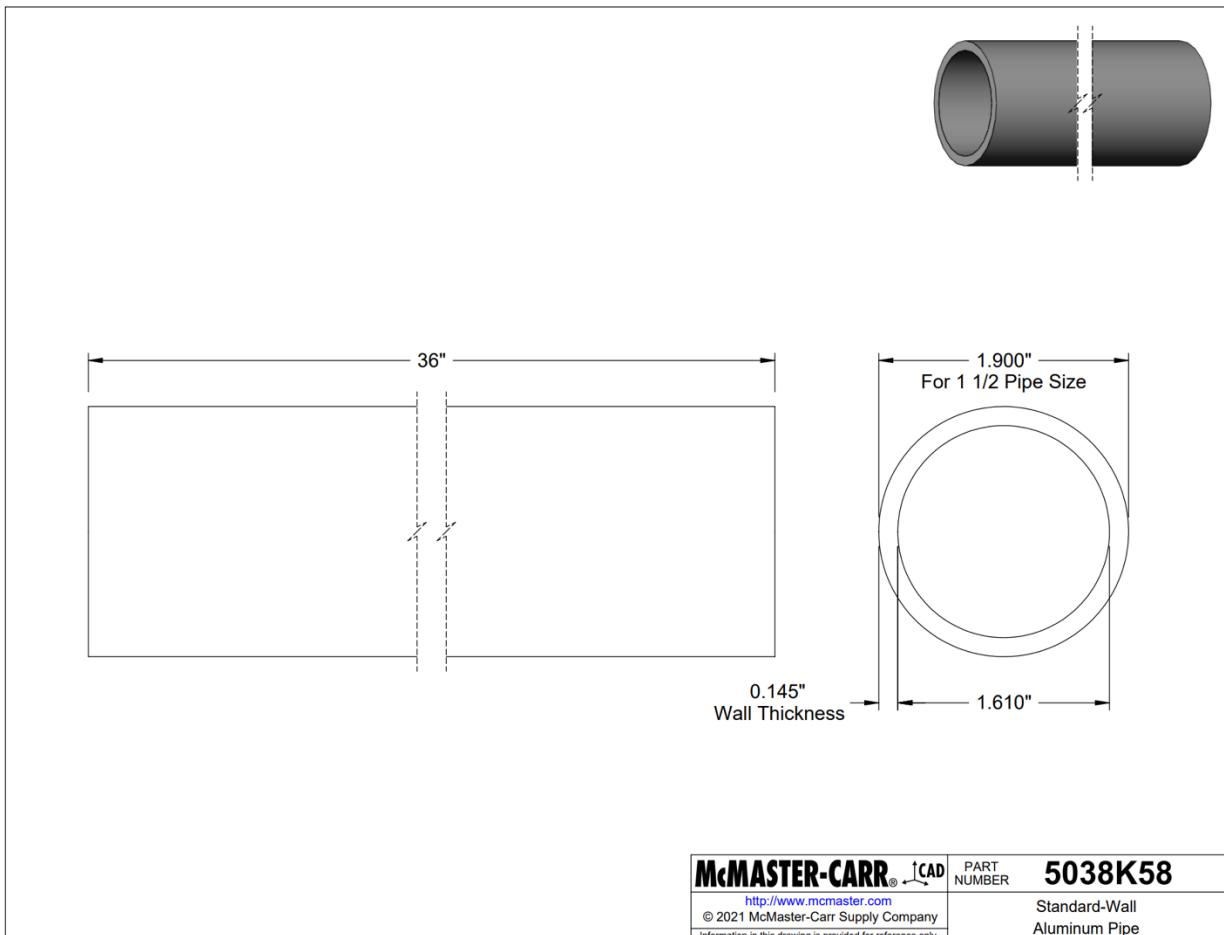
2D CAD drawing of the 5038K58 Pipe
